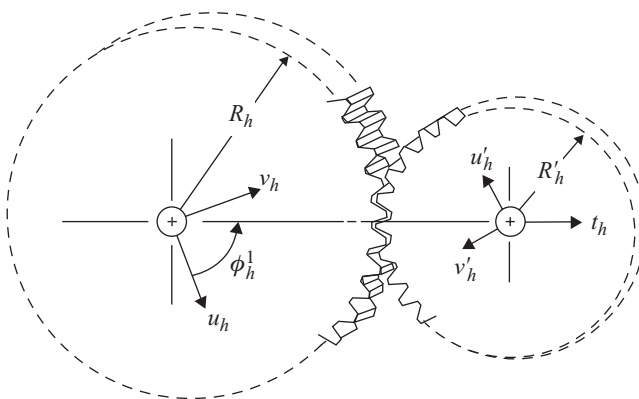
Coordinate systems for a parallel-axis gear joint.
